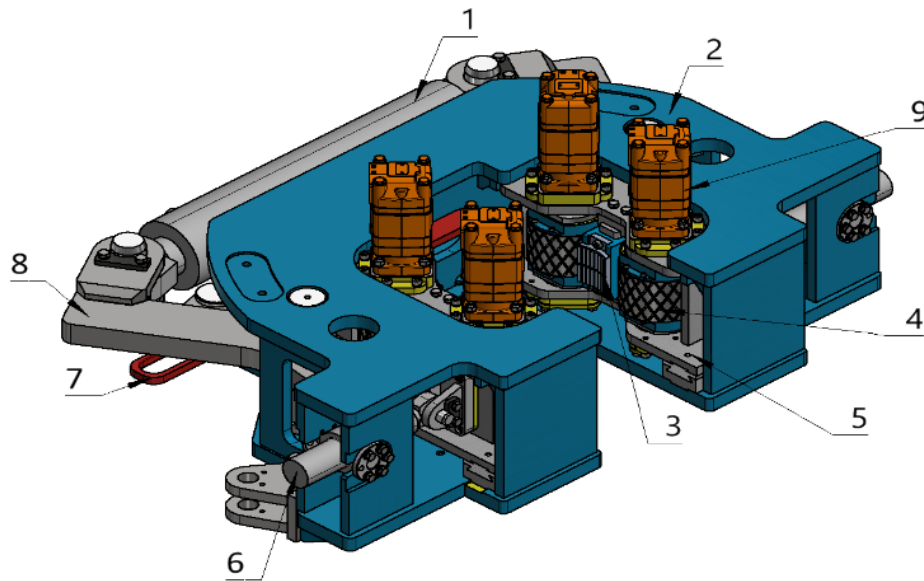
Schematic diagram of the upper clamp body structure.1.Clamping cylinder;2.Upper clamp seat;3.Clamping clamp;4.Spining buckle roller;5.Spining buckle roller seat;6.Counterclamping cylinder;7.Limit plate;8.Clamping arm;9.Swing motor.
